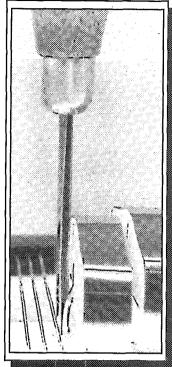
Easing a tight damper guide rail bushing with an "umbrella stay" tool from supply house. Inserted between the bushing and the wire, this tool enlarges the bushing by pressure. The tool is most effective when heated moderately. Use care not to push the bushings out of the rail, as most are not glued in.
